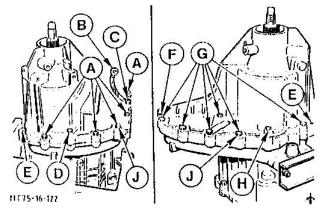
Bolts securing transfer box housing to rear transmission housing.
